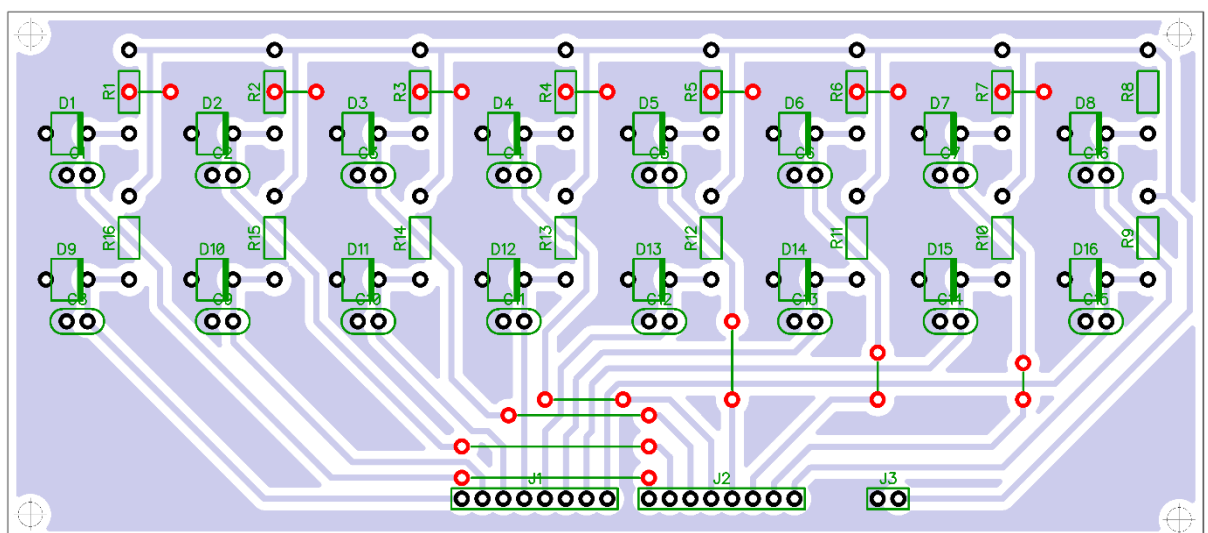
Artwork of the printed circuit board (PCB) for scale-model test
